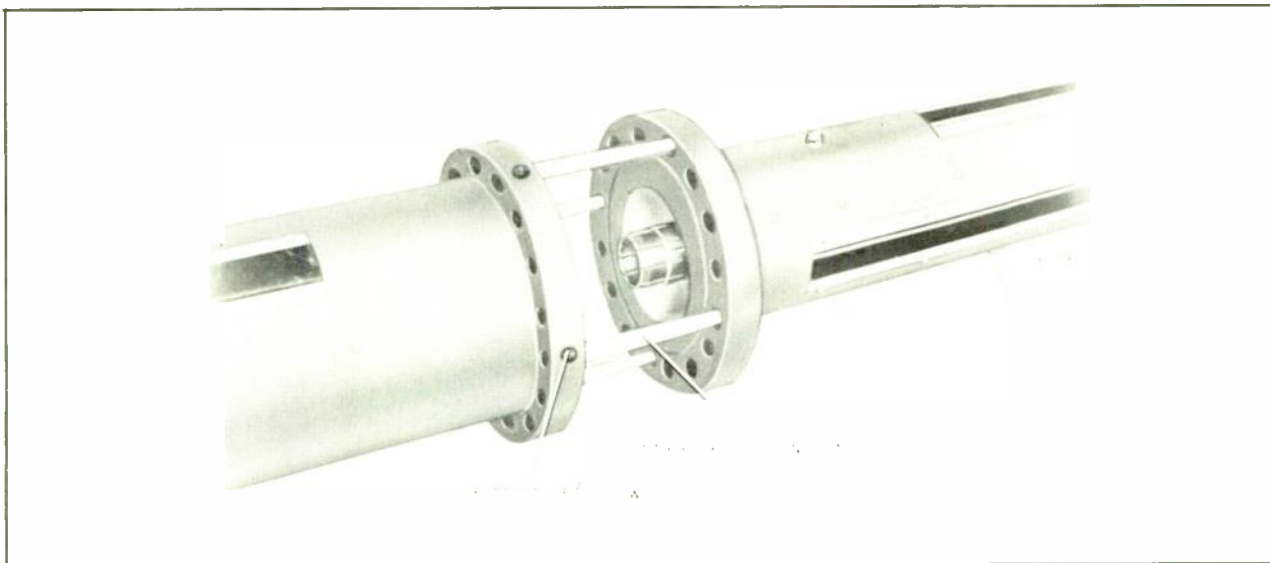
Unthreaded Aligning Pins Used in Assembling Flanged Ends of Adjoining Sections
